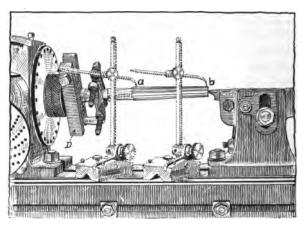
Set-up for milling flutes in taper reamer. A reamer already milled may be used to show that although the index head center is depressed to bring the bottom of the groove horizontal, that is, in the "line of cut," the cutting edge at a will still be higher than at b.
